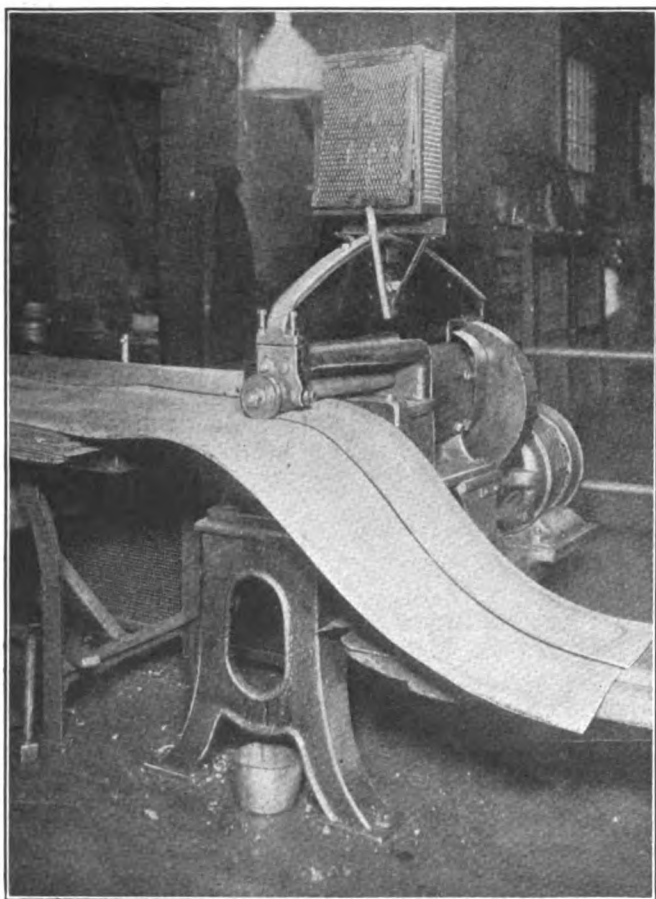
ADJUSTABLE SLITTING MACHINE FOR SHEET MATERIAL
